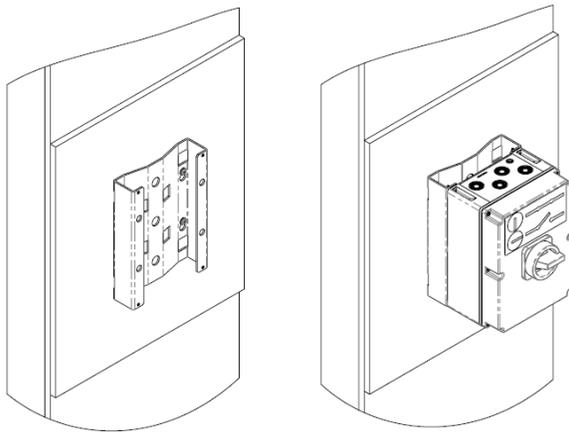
Mounting the DPX 48VDC load disconnect box to a wall
